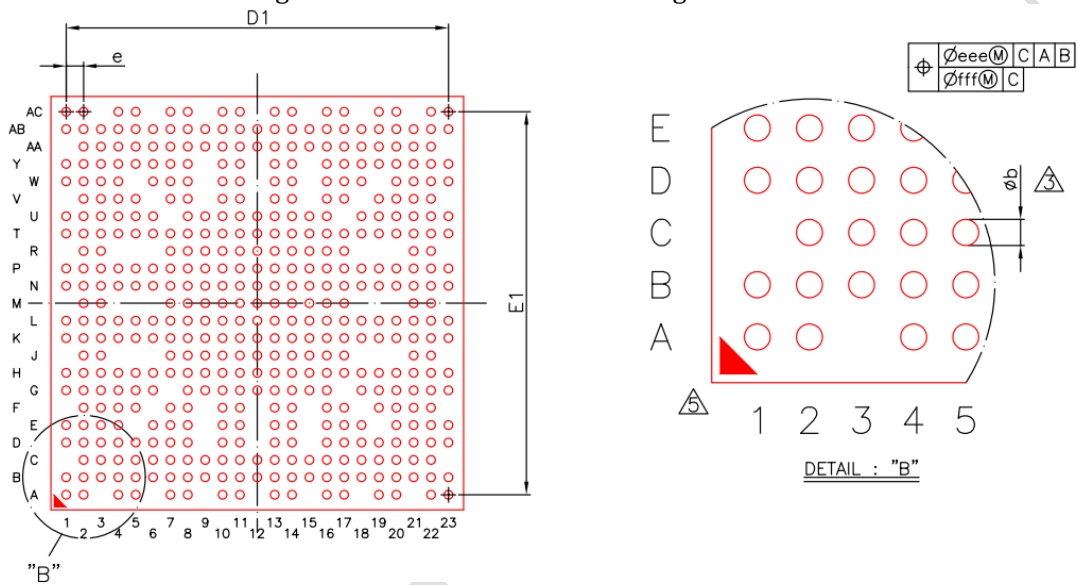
RK3168 TFBGA453L Package Bottom View
